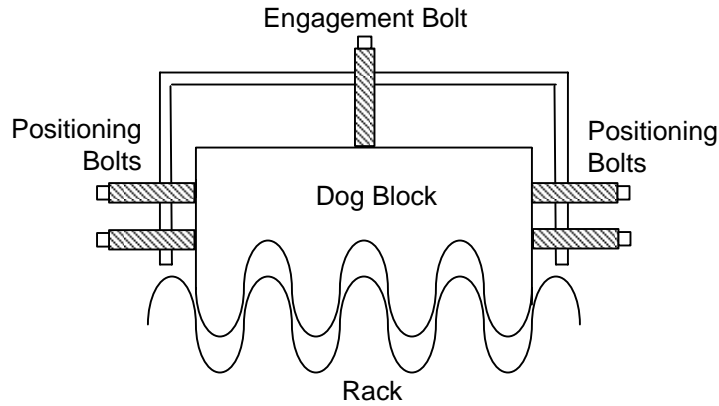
Holstein Rack and Pinion Gear Hydraulic Drive and Clamp Assembly
